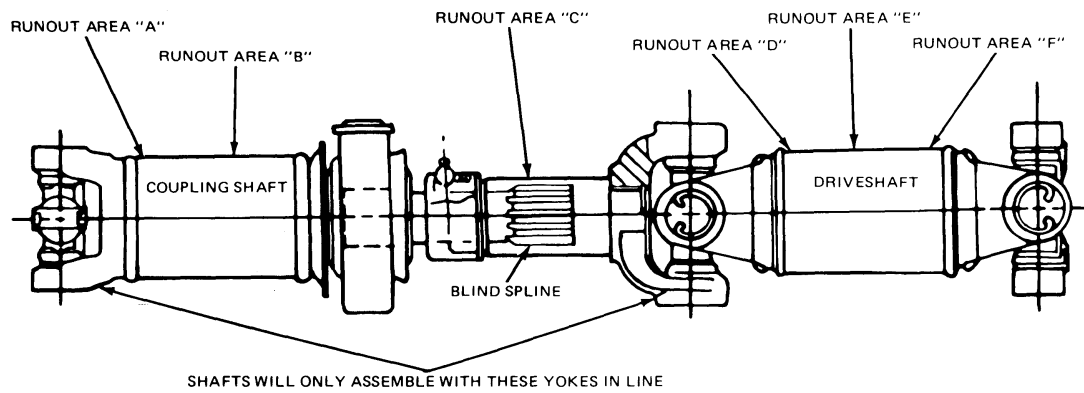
Runout Areas—Two Piece Driveshaft "Blind Spline" with Necked Down Coupling Shaft
